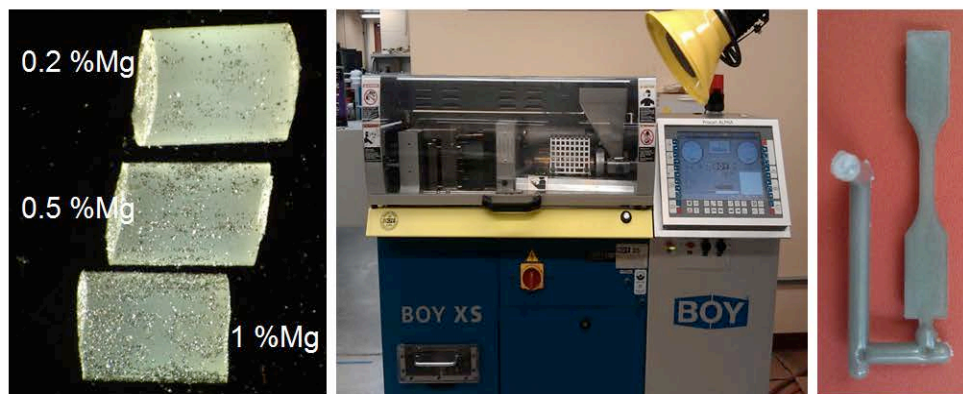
Fabrication of Polymer/Mg composites by injection moulding. Dumbbell-shaped test specimens (Gage length: 14 mm, Width and thickness: 3.2 mm)
